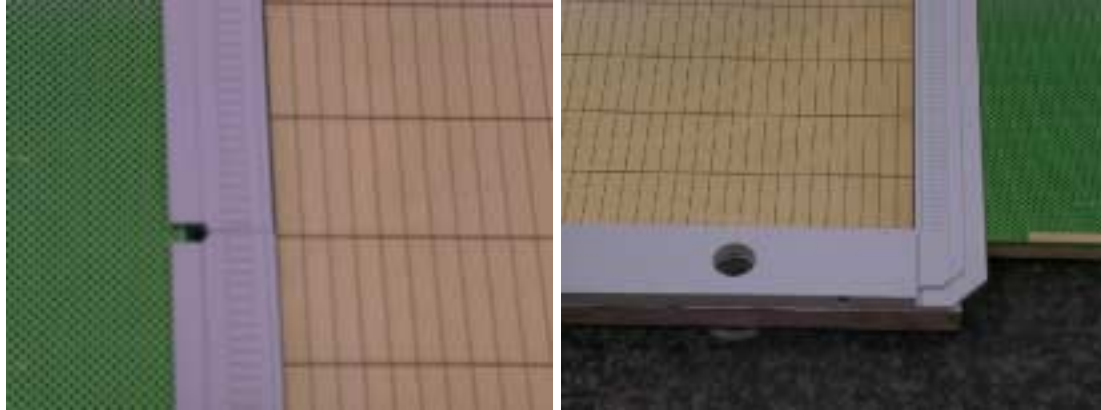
Spacers glued on PCB: linear (left) and angular (right) types.
